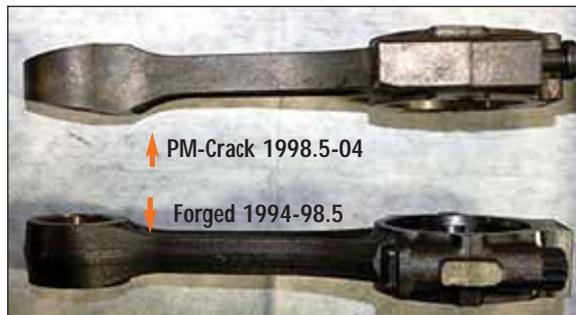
The upper rod is a powder metal cracked rod for use with the late 7.3L DIT block and crank. The lower rod is forged and used with both early cranks and the early block.
